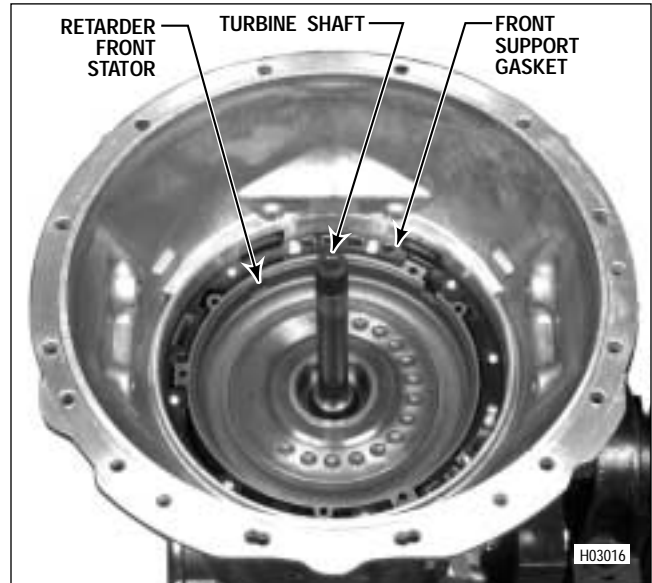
Removing Front Support Gasket (Models With Retarder)
